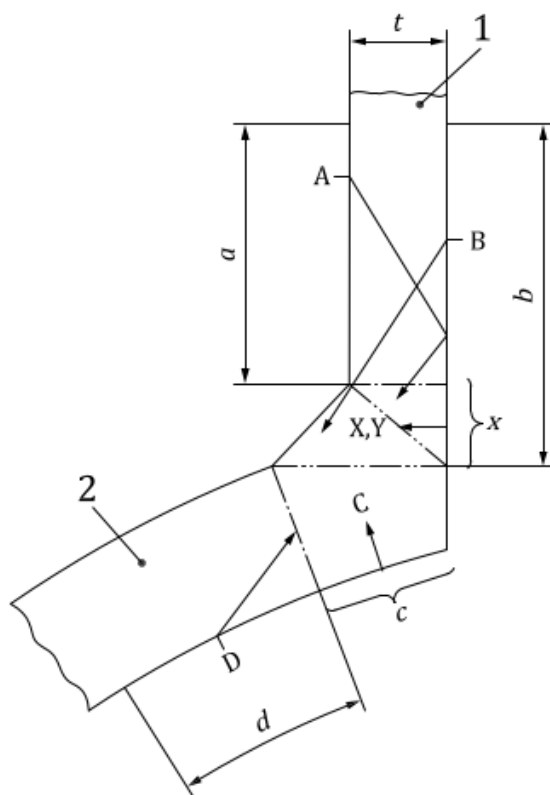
Examples of probe positions for a set-through nozzle joint
